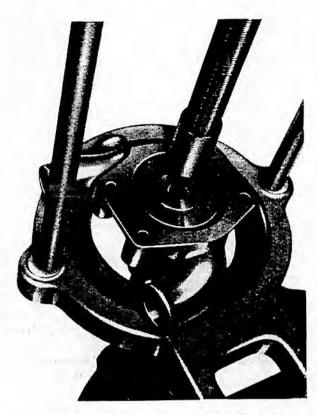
REMOVING SHAFT, BEARINGS, AND IMPELLER (3-A-152 ENGINE).
